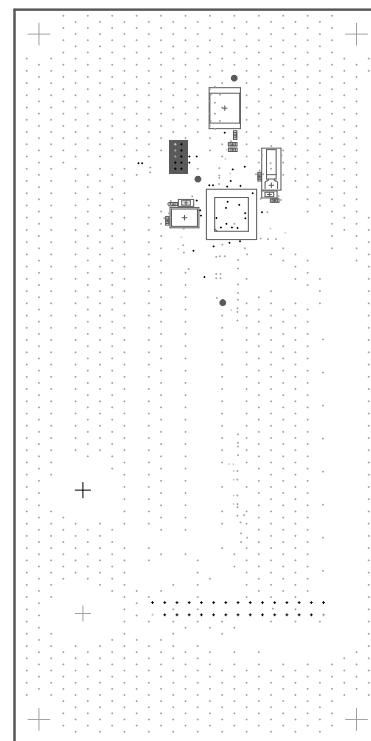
Embedded capacitance 6-layer design, mechanical drawing bottom.
